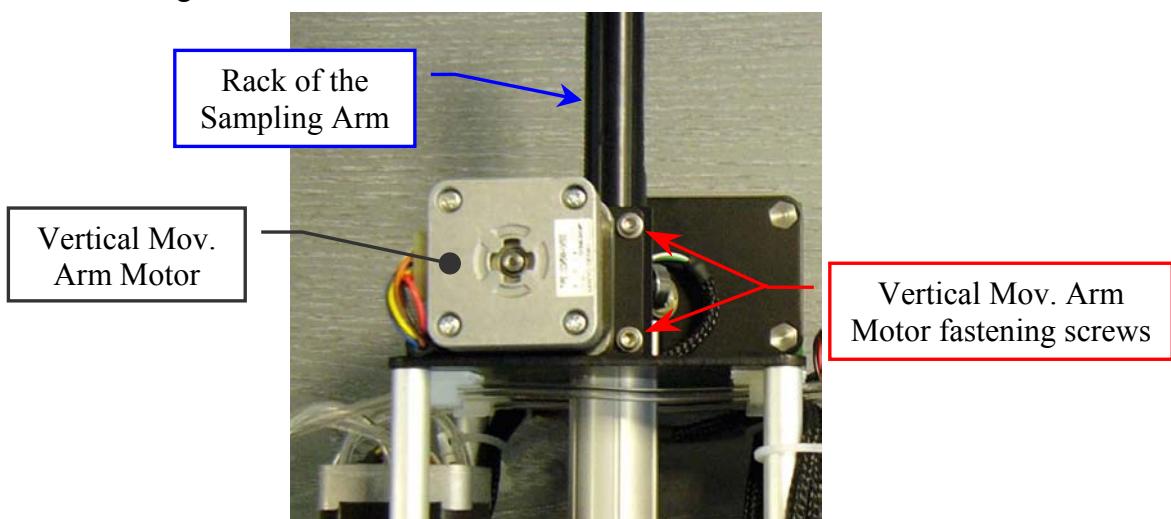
Vertical Mov. Arm Motor fastening screws
